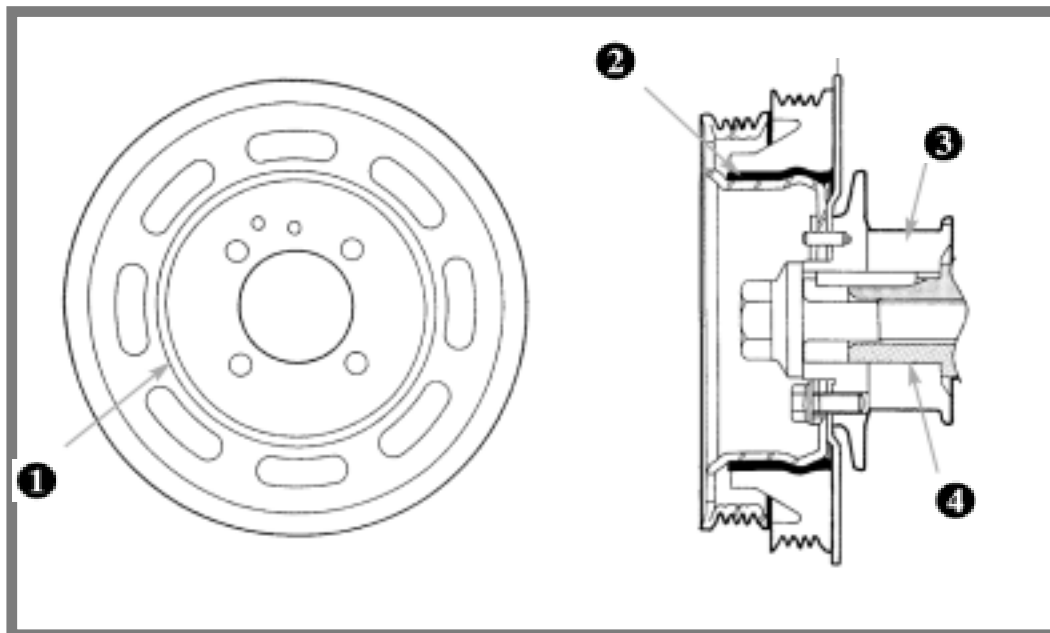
The torsional damper controls twisting of the crankshaft.
